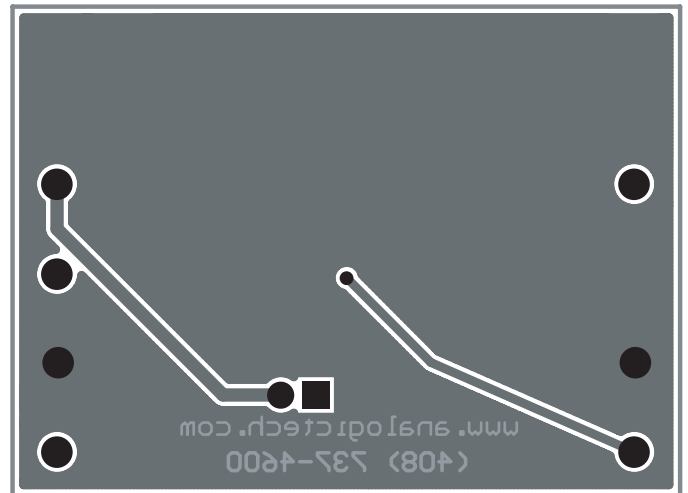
AAT4672 Evaluation Board Bottom Side Layout.
